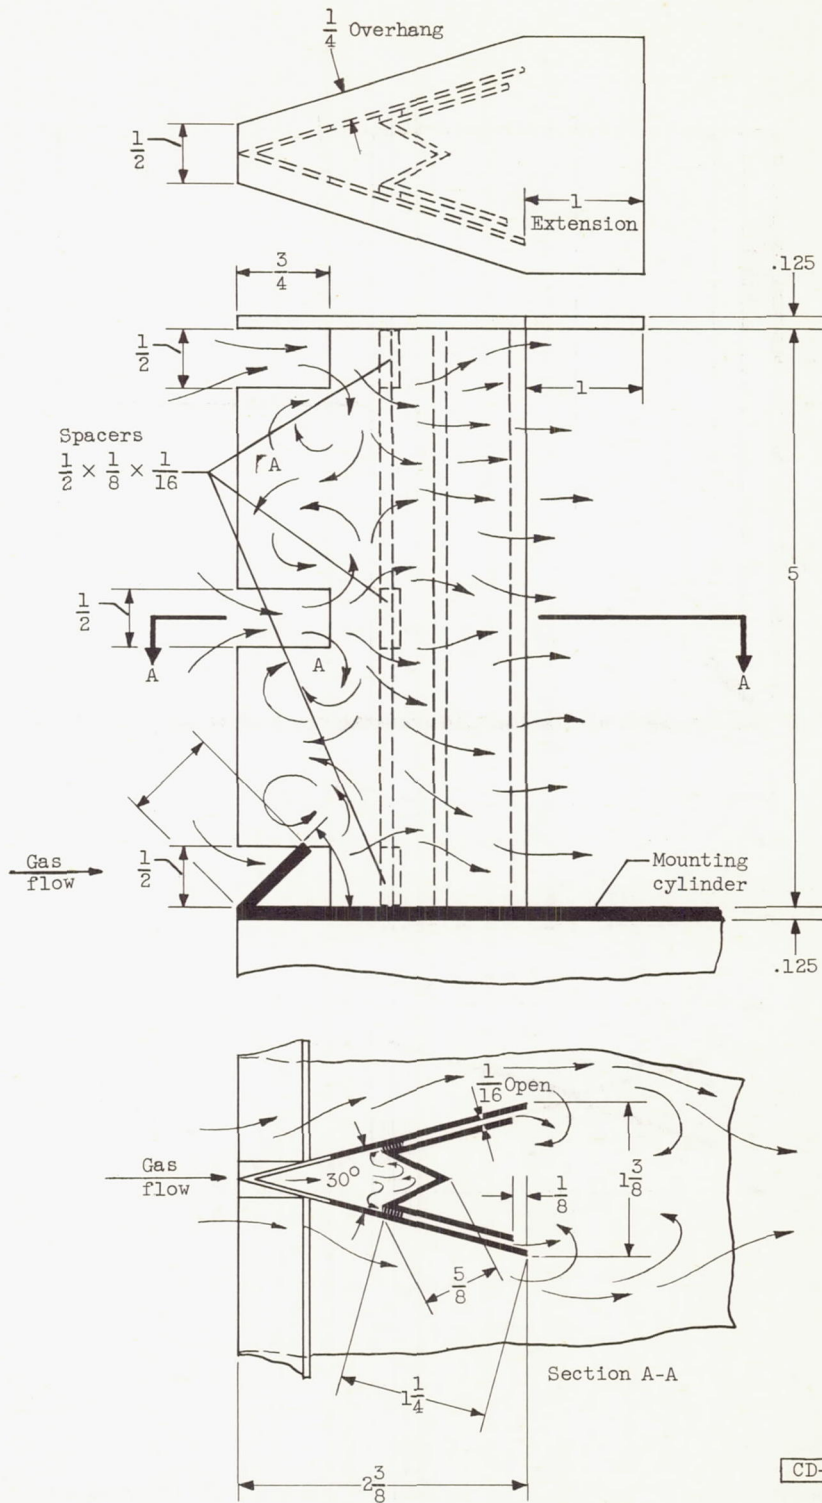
Continued. Sketches of type 7 flame holding elements investigated. (All dimensions in inches.)
